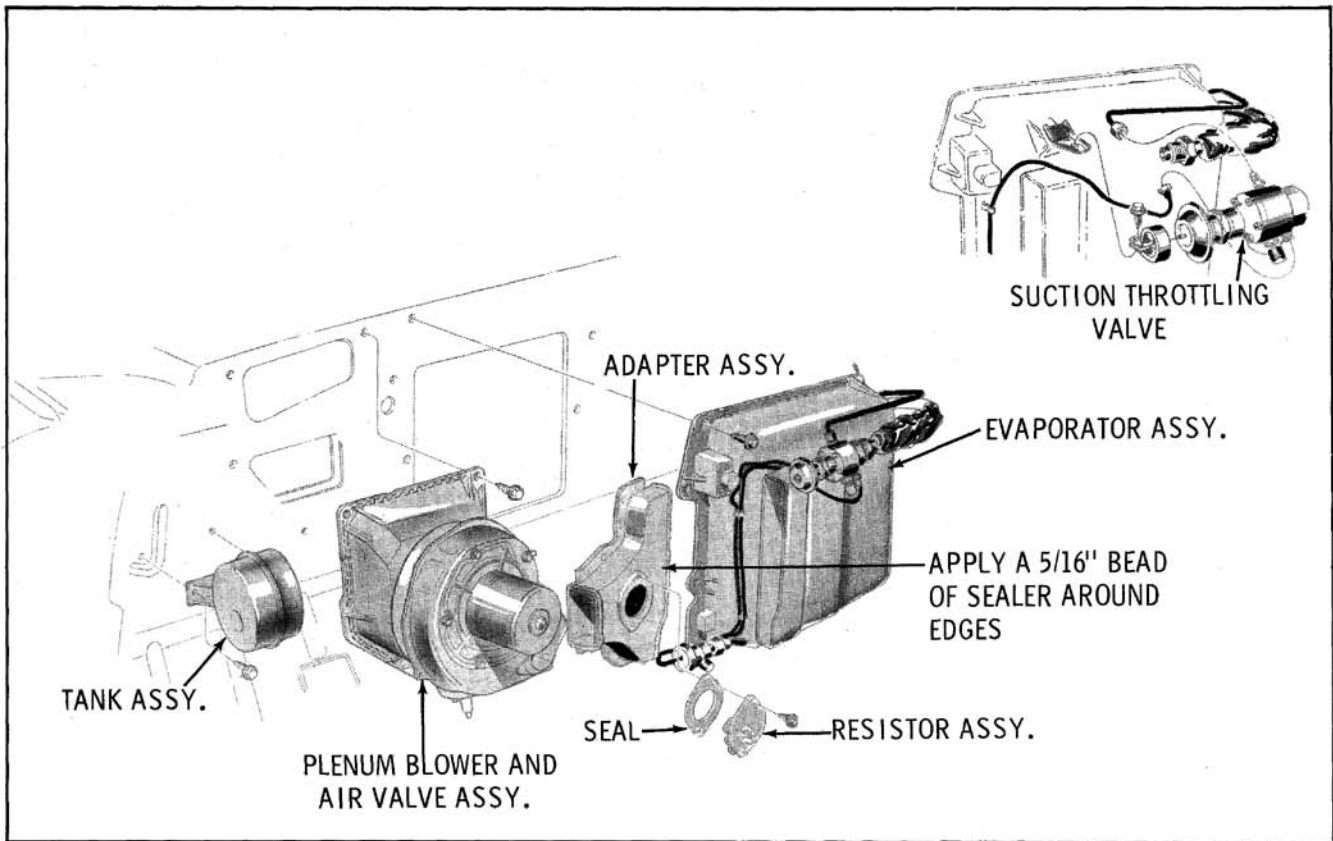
Blower Motor and Evaporator (52 through 86 Series)
